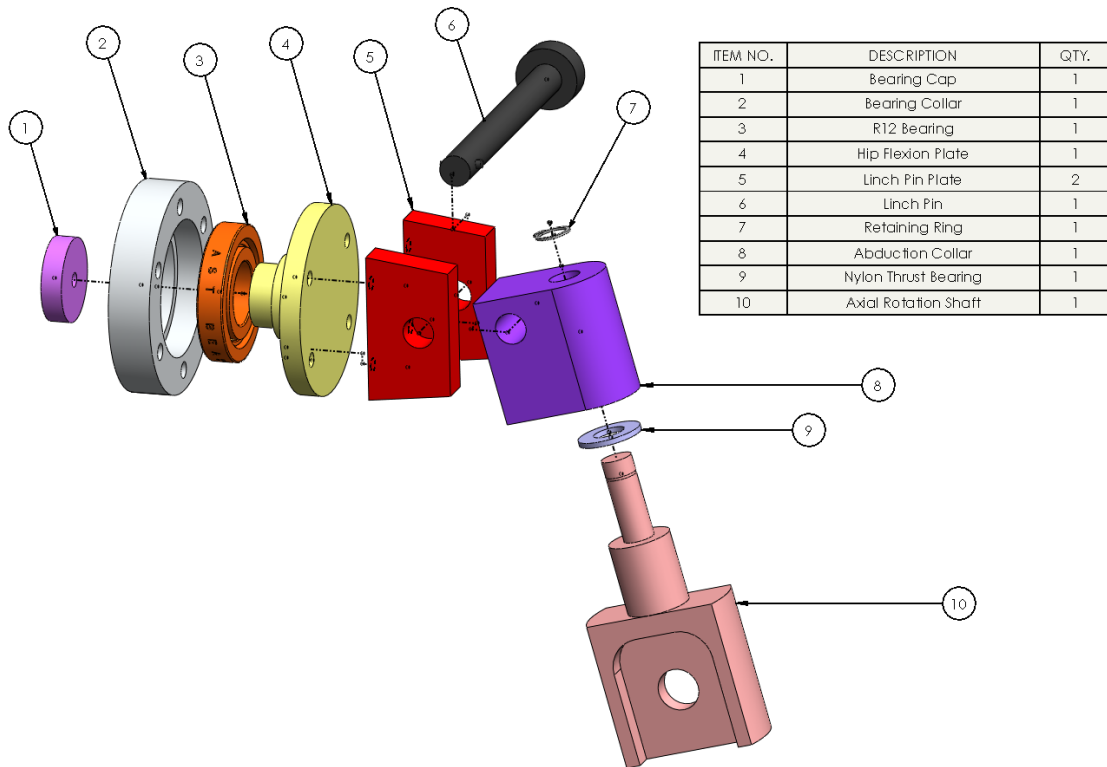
The exploded hip joint assembly. The R12 bearing (3) is seated inside the bearing collar (2). The inner race of the bearing is fit to the inner diameter of the Hip Flexion Plate (5). This assembly provides three degrees of freedom: 1) Hip flexion through the R12 Bearing. 2) Hip abduction through the Abduction Collar (8). 3) Hip axial rotation through the Axial Rotation Shaft (10).
